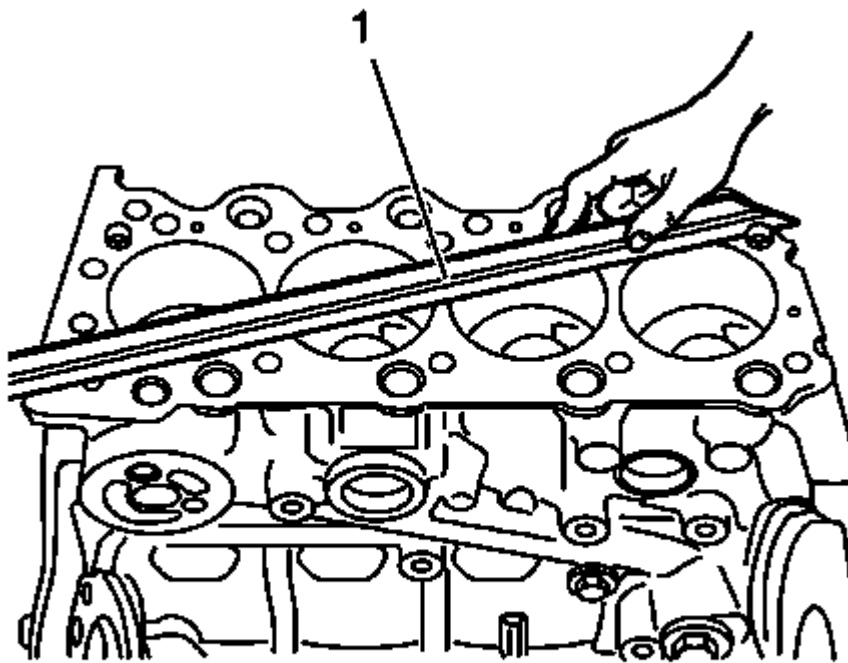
Inspecting Engine Block For Distortion Using Straight Edge
